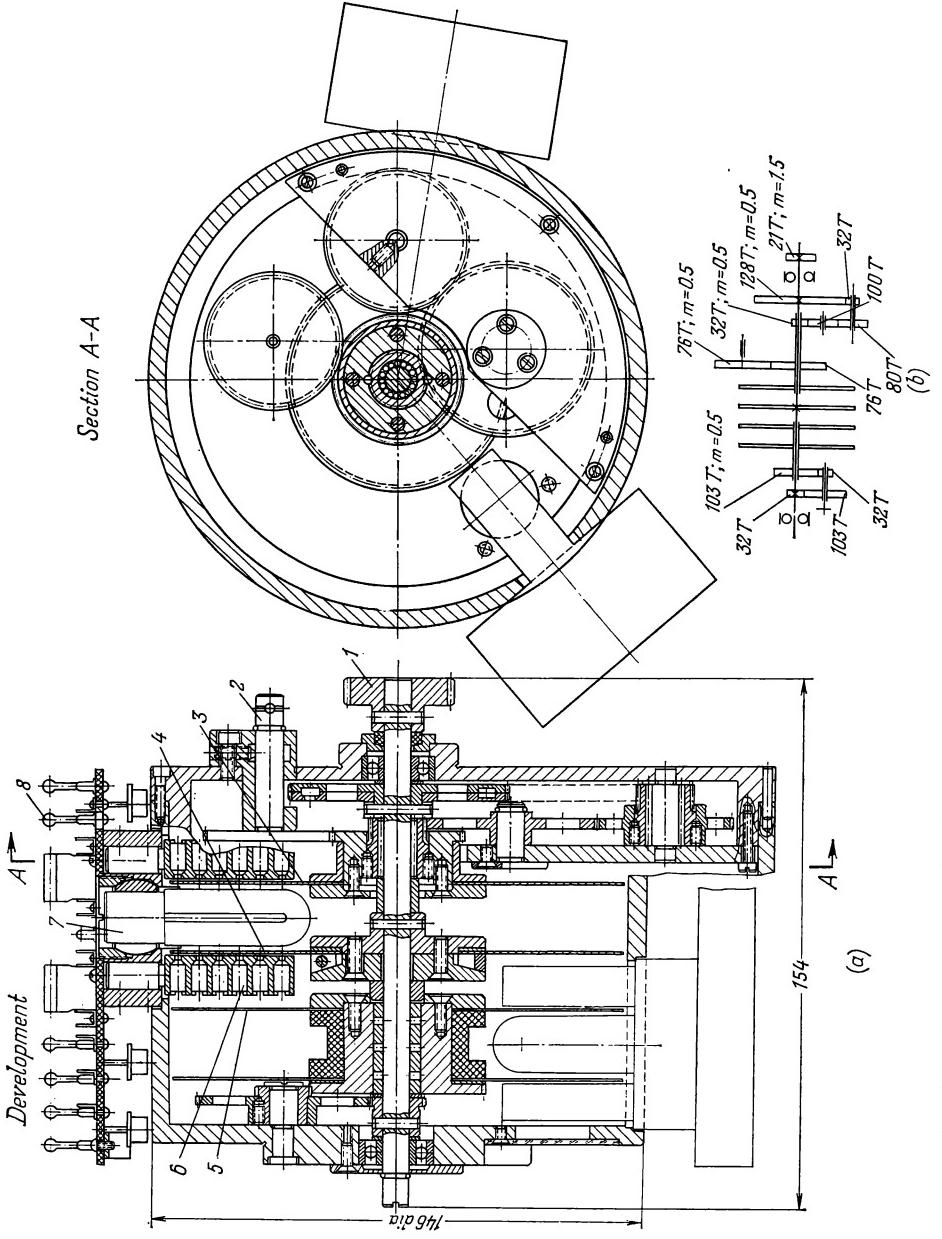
Contactless feedback transducer with encoded disks in the model 2A450II jig borer:
